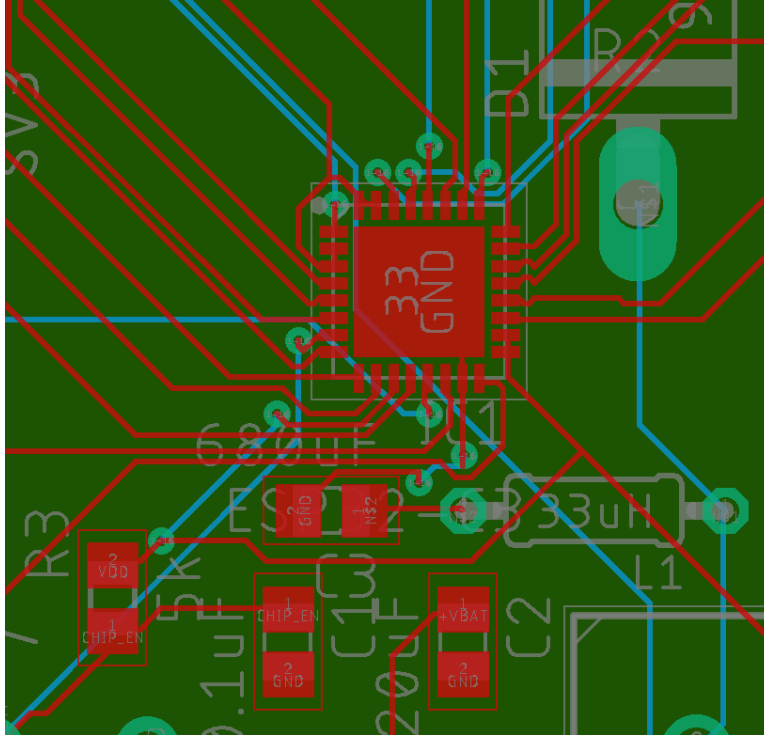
PCB Design of the Microcontroller Module
